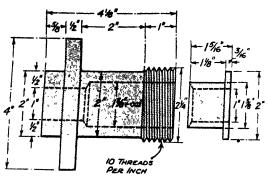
Valve-rod Gland with Packing collet Showing the finished machined casting after the turning operations described in the text.
